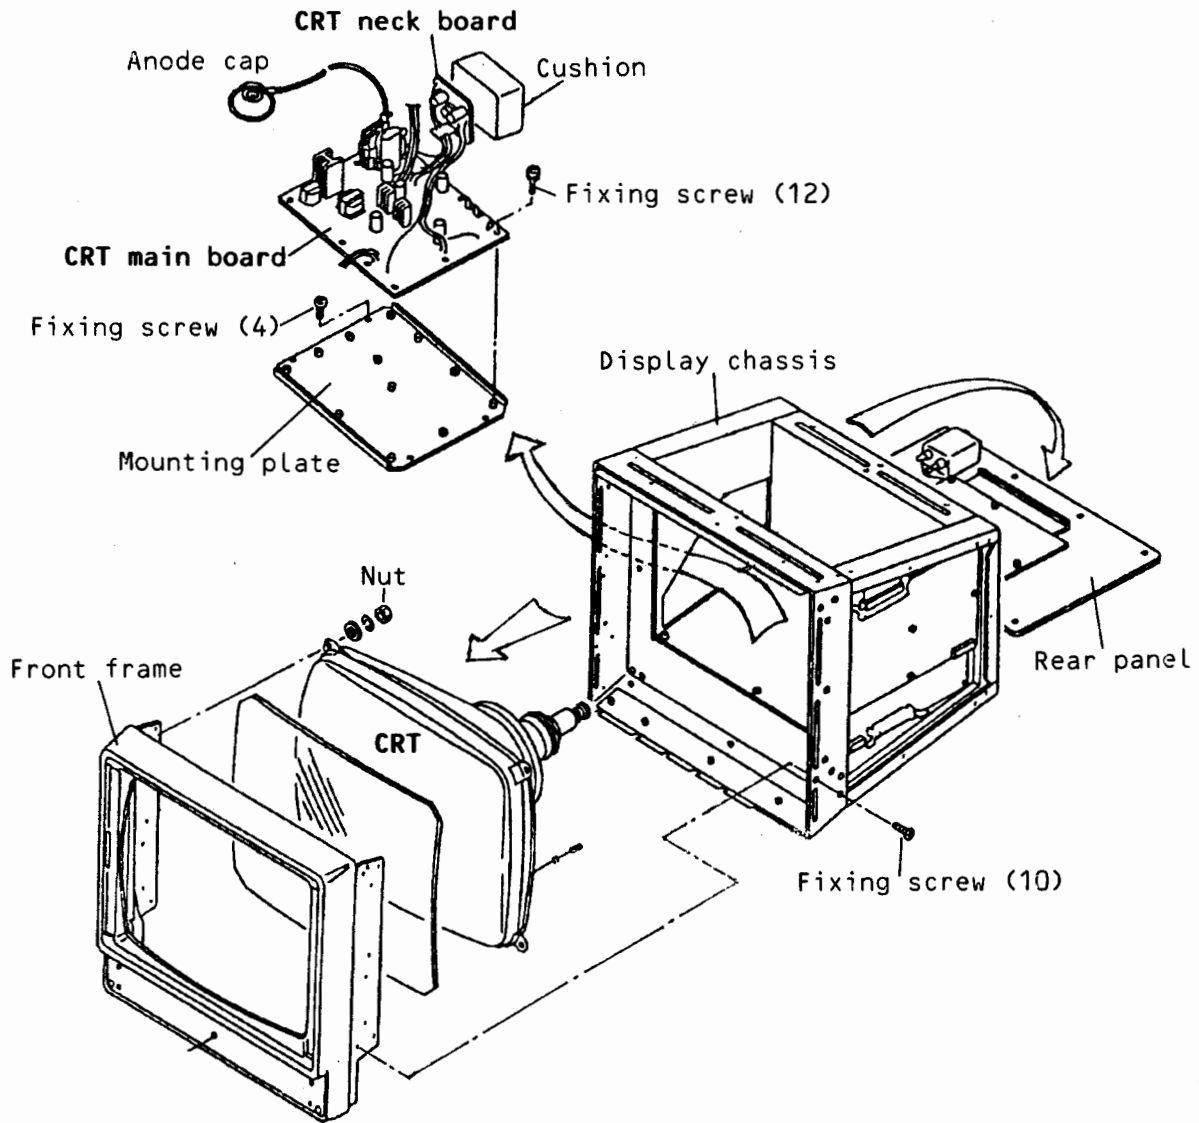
Dismounting CRT and CRT Boards
